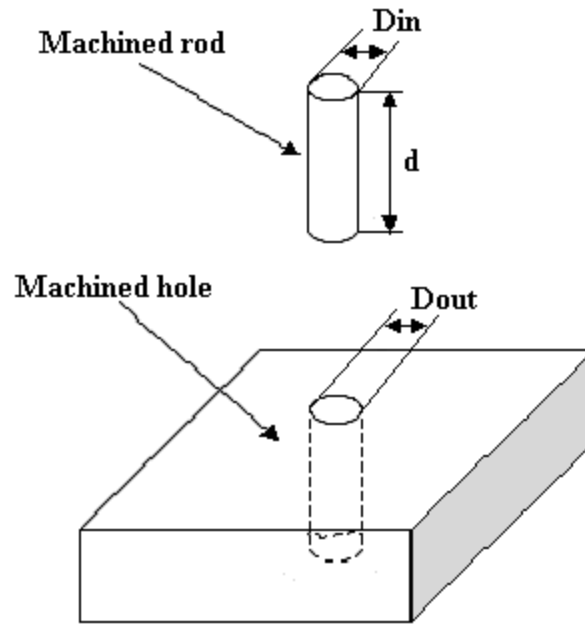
Illustration of the hole and rod machined by rotary ultrasonic machining.
